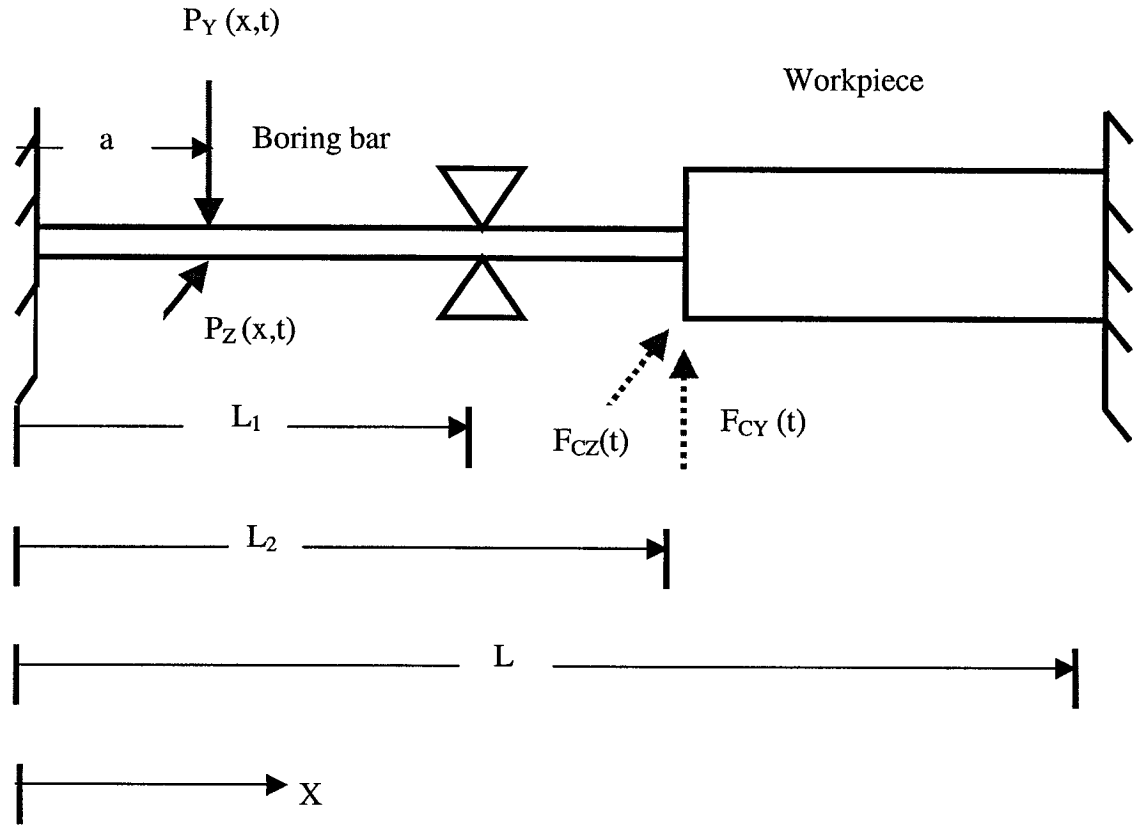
Boring bar-workpiece assembly with the cutting forces and control forces.
